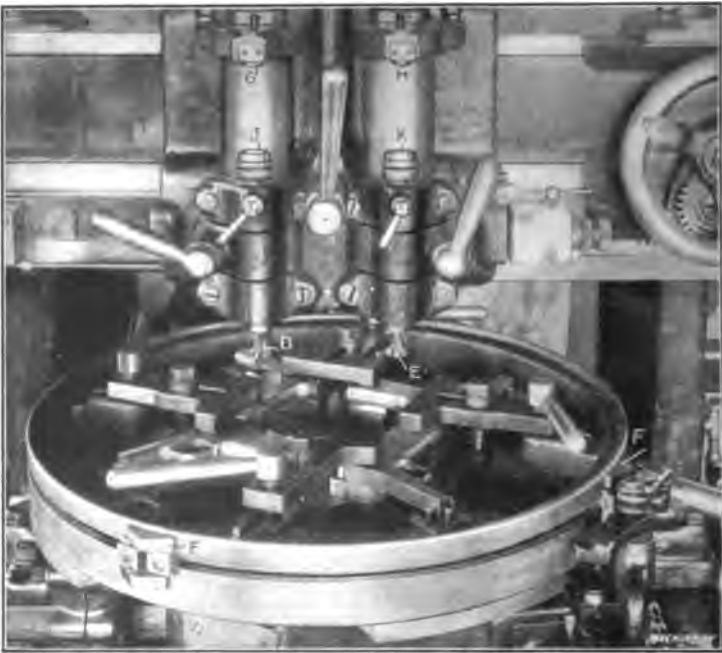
Semi-automatic Profiling Machine milling Automatic Pistol Frames
